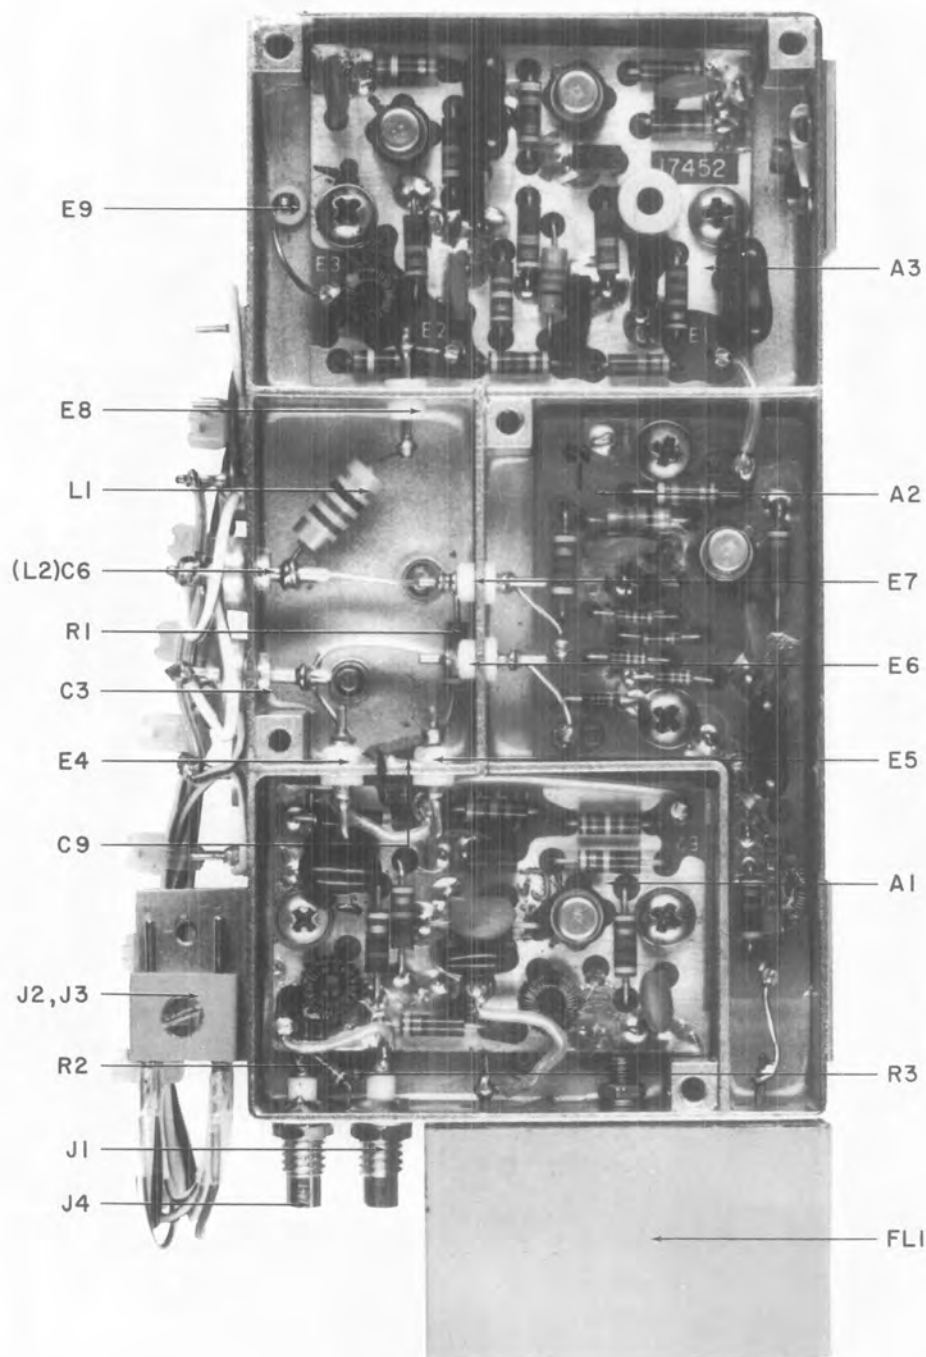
Type 72427-(X) IF Demodulator Assembly (A2), Right Side View, Location of Components
